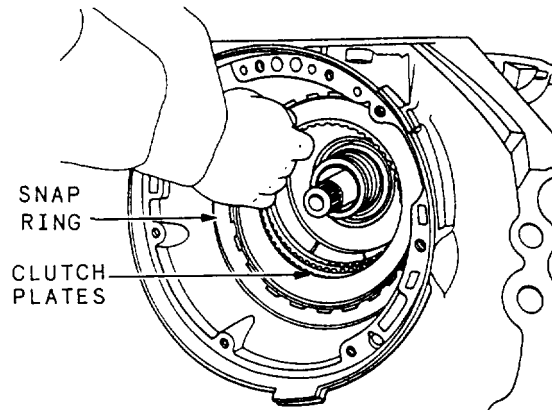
Removing the intermediate backing plate and clutch plate.
